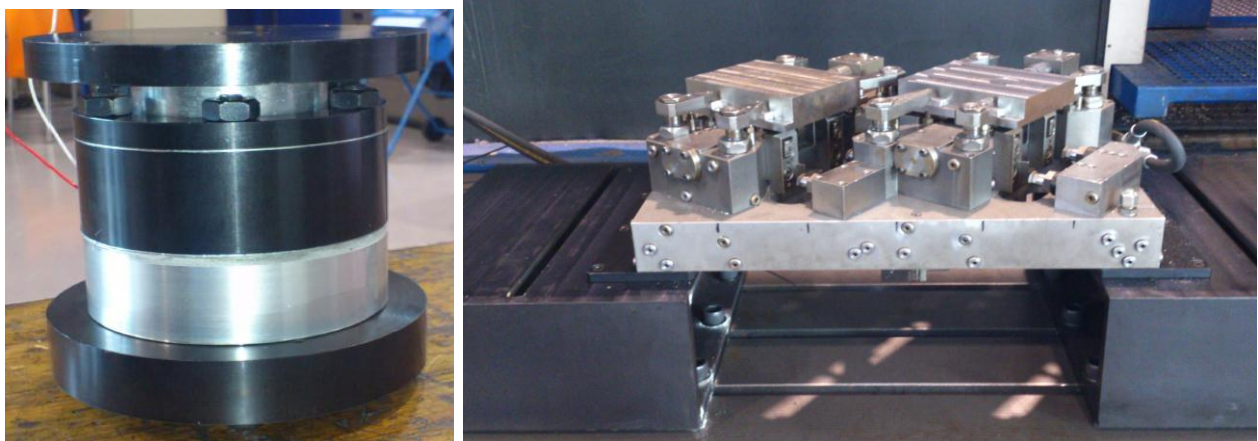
Modified MRF prototype and MATZAT workpiece fixture
